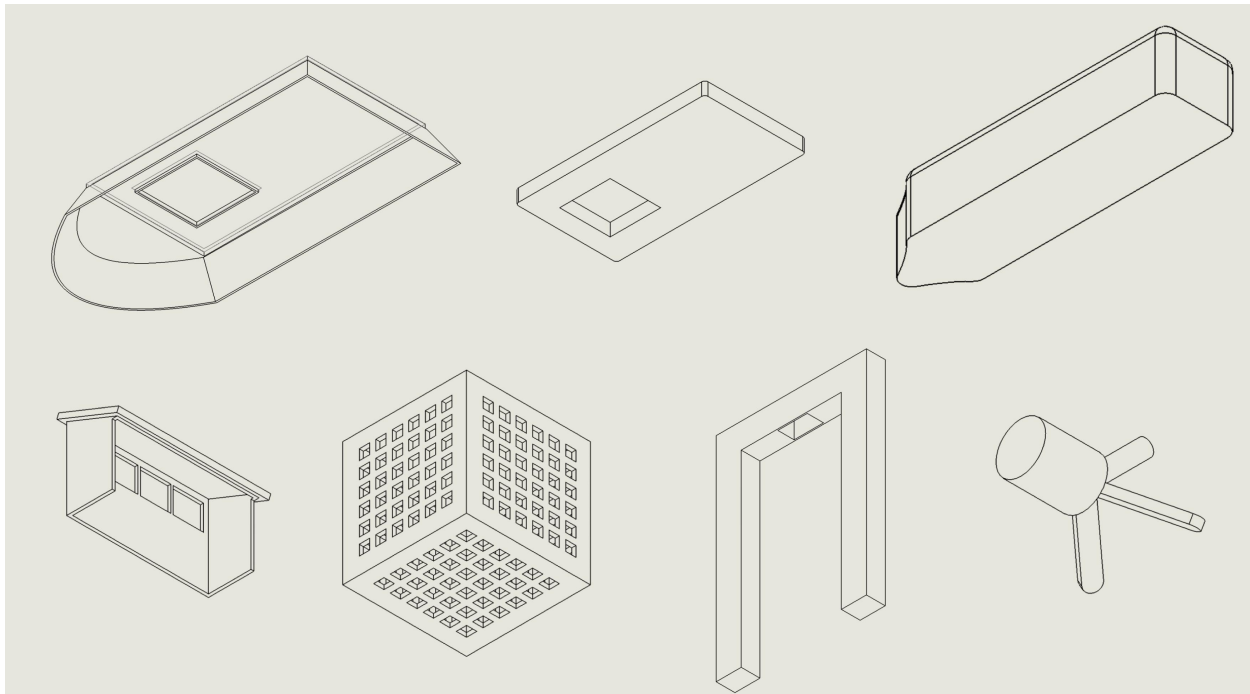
Isometric View of the 7 Custom 3D-Printed Modular Components
